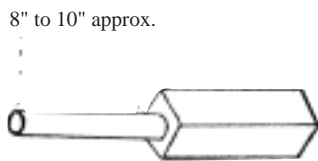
2" by 2" by 18" oak, one end trimmed to form the body of the crank
